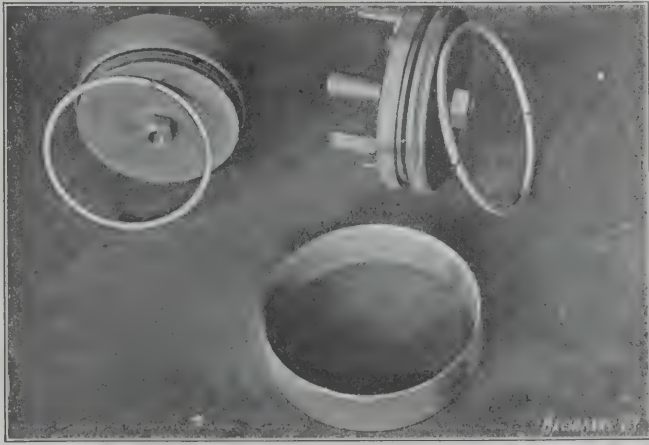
Self-Centering Clamping Mandrel for Holding Split Packing Rings while re-turning the Outside
